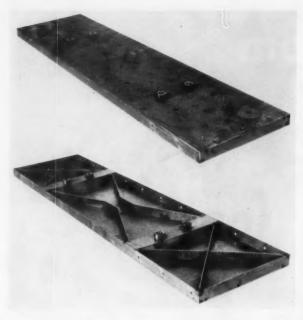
Top and reverse side views of arc welded steel rail, twice the length of the cast design. Skip welding is used to attach bracing to the top sheet. This design effects a cost saving of 71 per cent and a weight reduction of 57 per cent.
